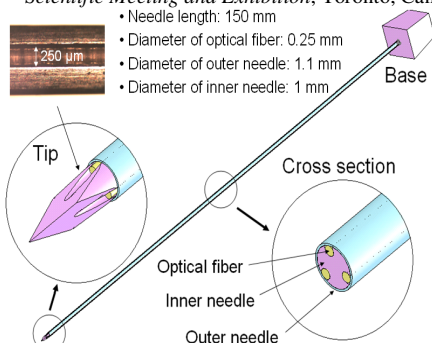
CAD Model of fabricated 18-ga needle, and magnification of one of the needle grooves, 250-μm deep and wide, machined using EDM.
